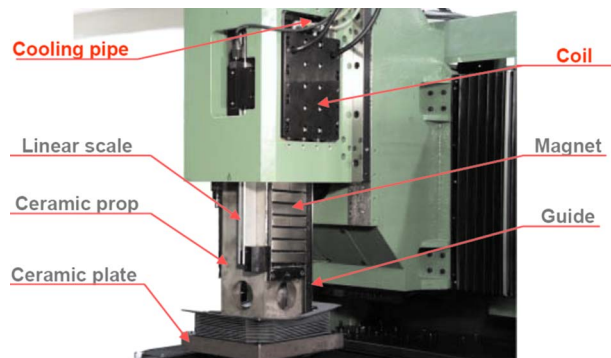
Z-axis structure of an EDM machine (Courtesy of Sodick Inc., Schaumburg, IL)
